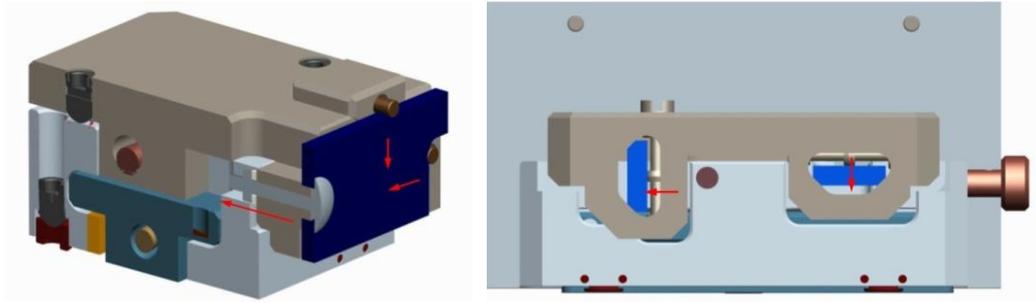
Emitter and receiver sensor-plate mounting on the groundplate.
